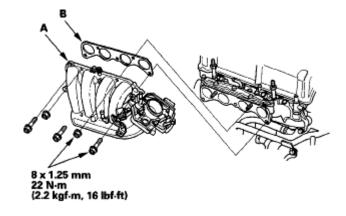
Identifying Intake Manifold Courtesy of AMERICAN HONDA MOTOR CO., INC.
